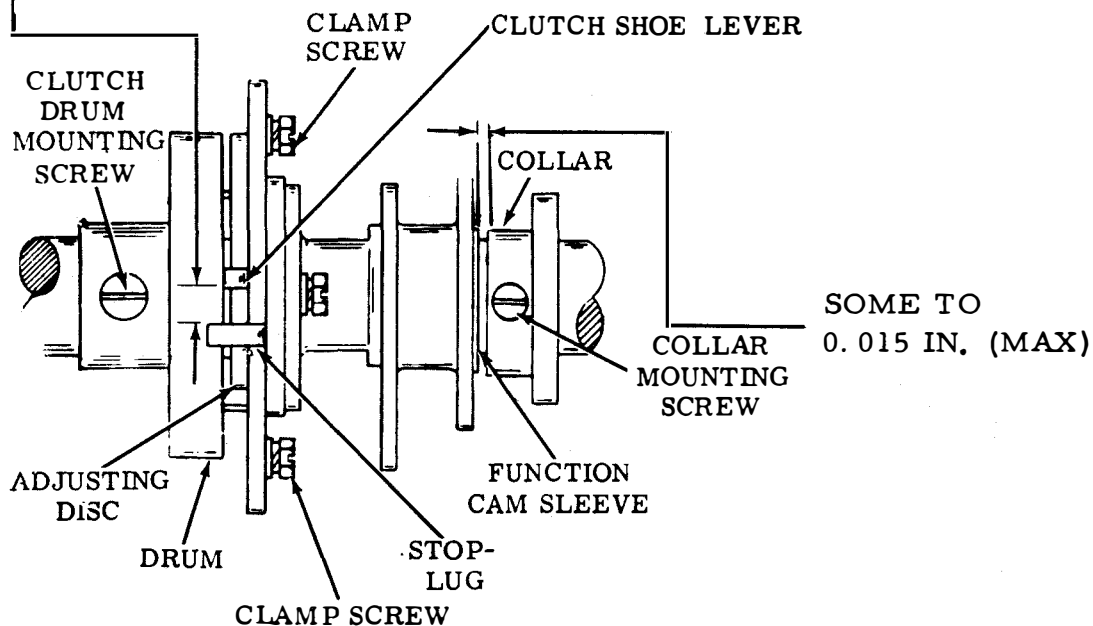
Clutch Shoe Lever and Function Clutch Drum End Play For One-Shaft Units - Right Side View
